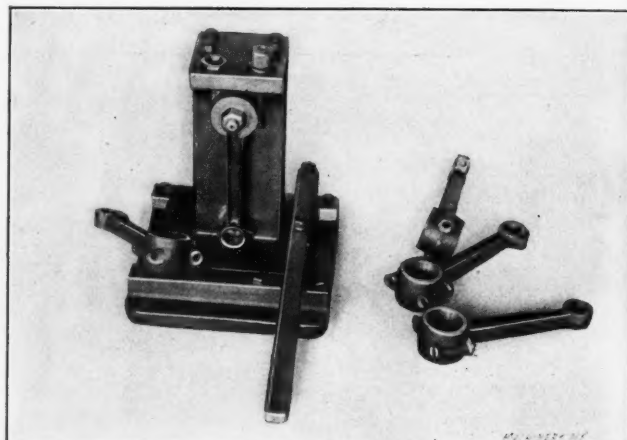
Jig for Drilling the Holes in the Connecting-rod Caps
